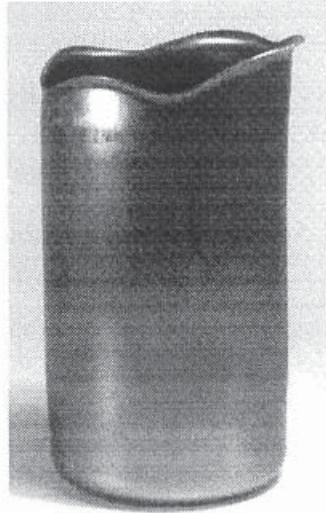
Example of an earing which is caused by either misplacement of the blank or misalignment of the tool parts.
